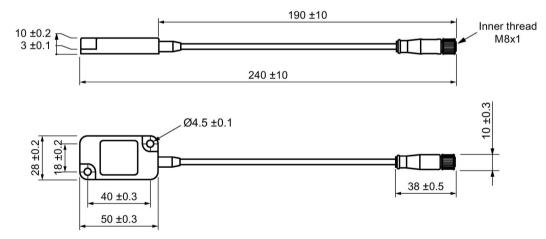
Dimension drawing ANT 3 7 ANT 3S
